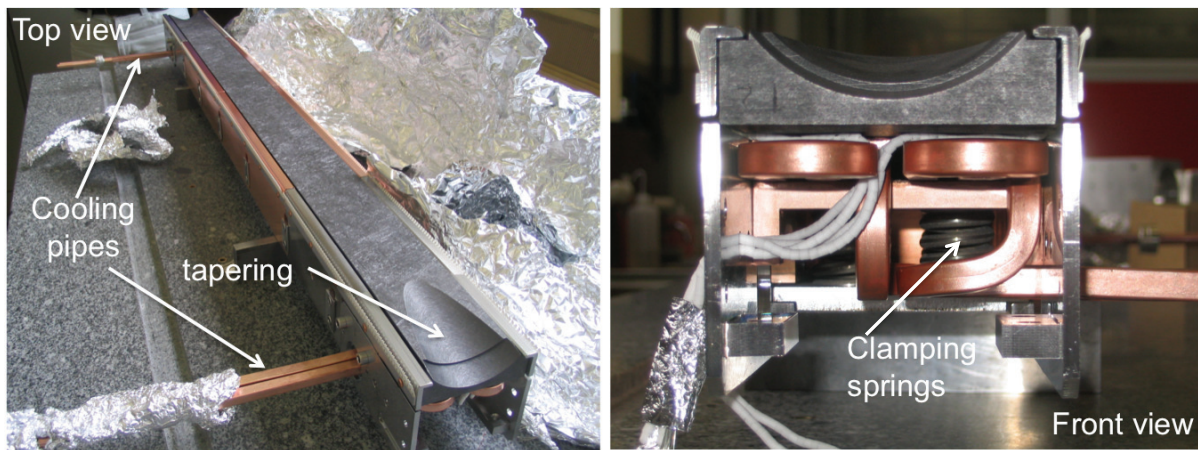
Top and front view of a secondary collimator jaw assembly. The CFC jaw measures in total 120 cm: 100 cm of active length plus 10 cm of tapering at each end (top view). Thermal contact with the cooling pipe is enhanced by a system of springs located behind the GlidCop support bar (front view).
